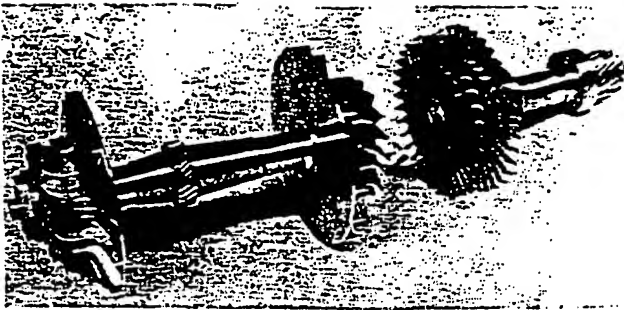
Rotors of Austin 30 hp two-shaft turbine
